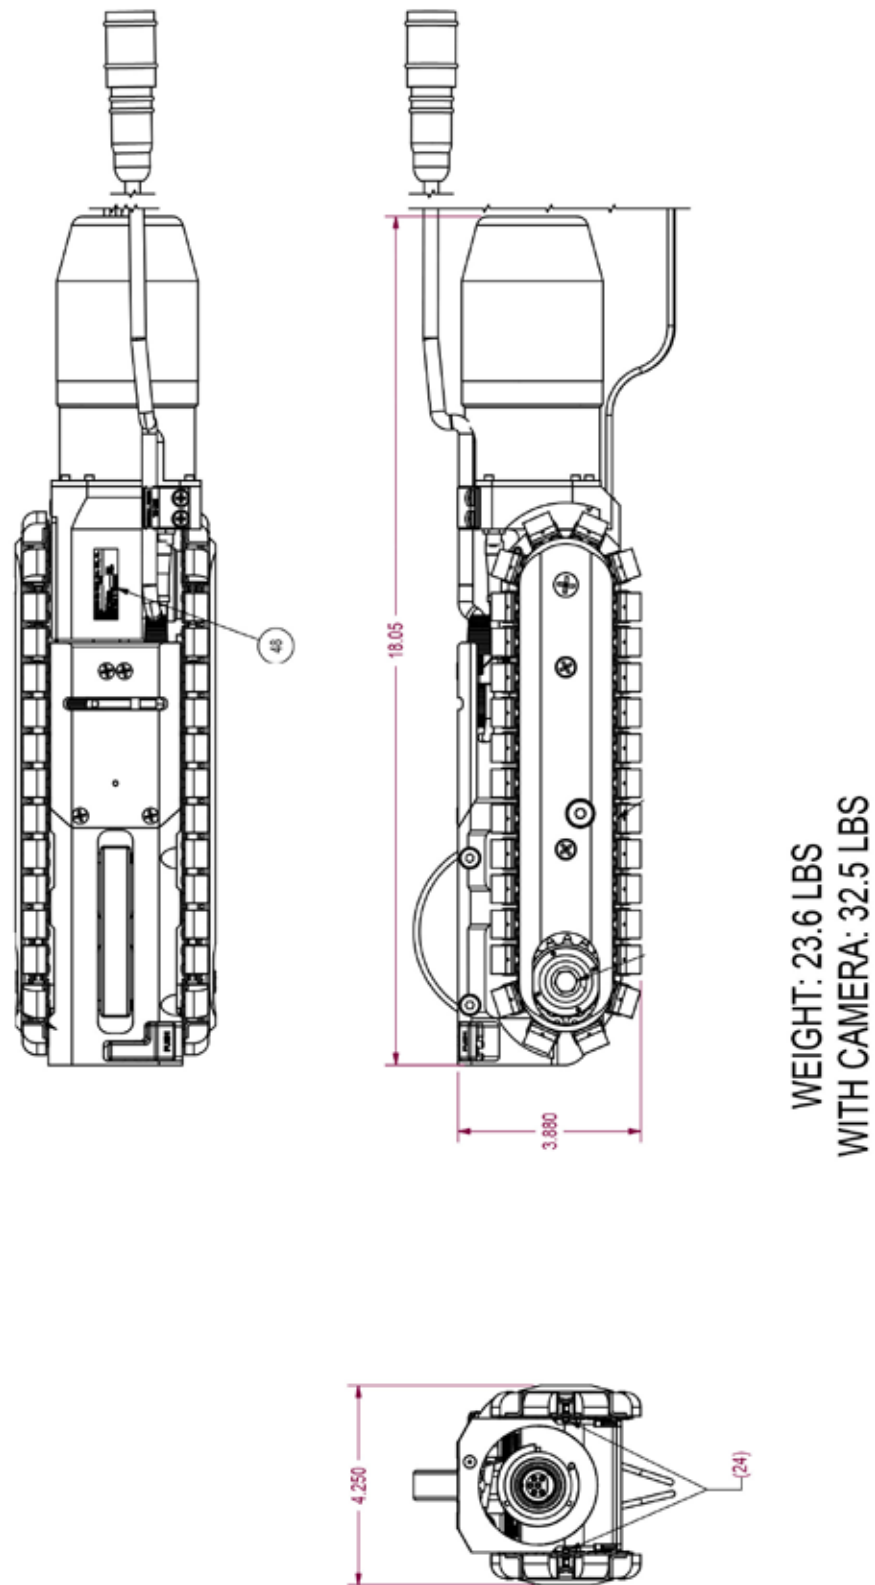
Transporter Assembly, Ultra Shorty III, TX360
